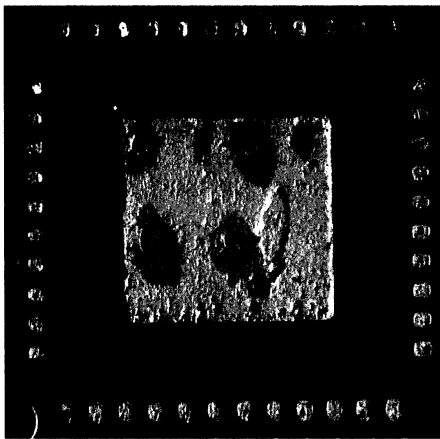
(a) Sheared surface of solder joint on PCB side (unit 1-B-3).
